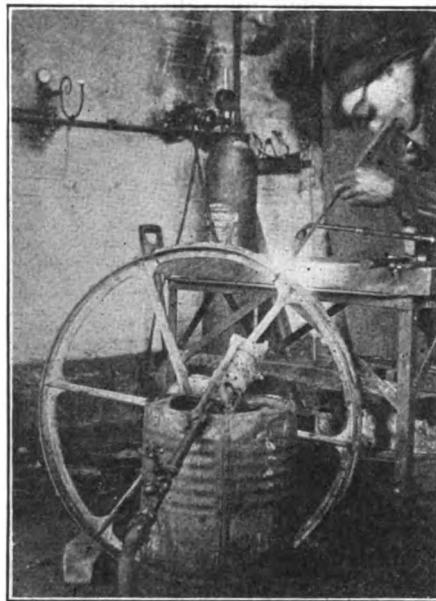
SHOWING HOW THE PREHEATER WAS USED WHILE MAKING THE LAST WELD
